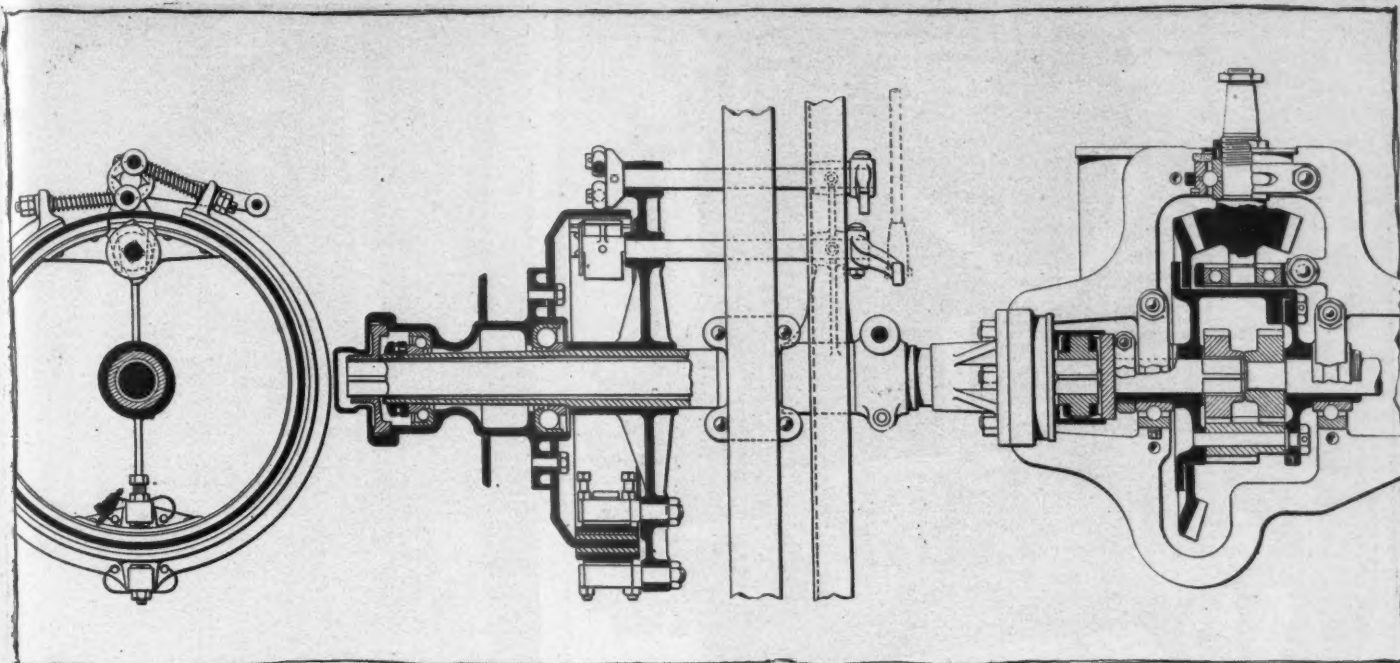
MECHANICAL DRAWING SHOWING FEATURES OF MOON MODEL 45 REAR AXLE CONSTRUCTION
